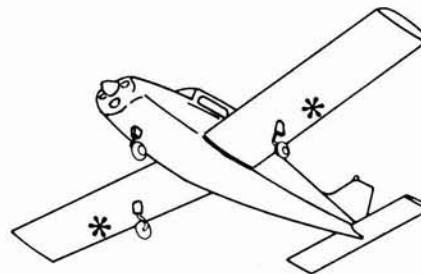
Access Hole for Aileron Bellcrank Pivot Bolt (Underside of LH Wing Shown)
